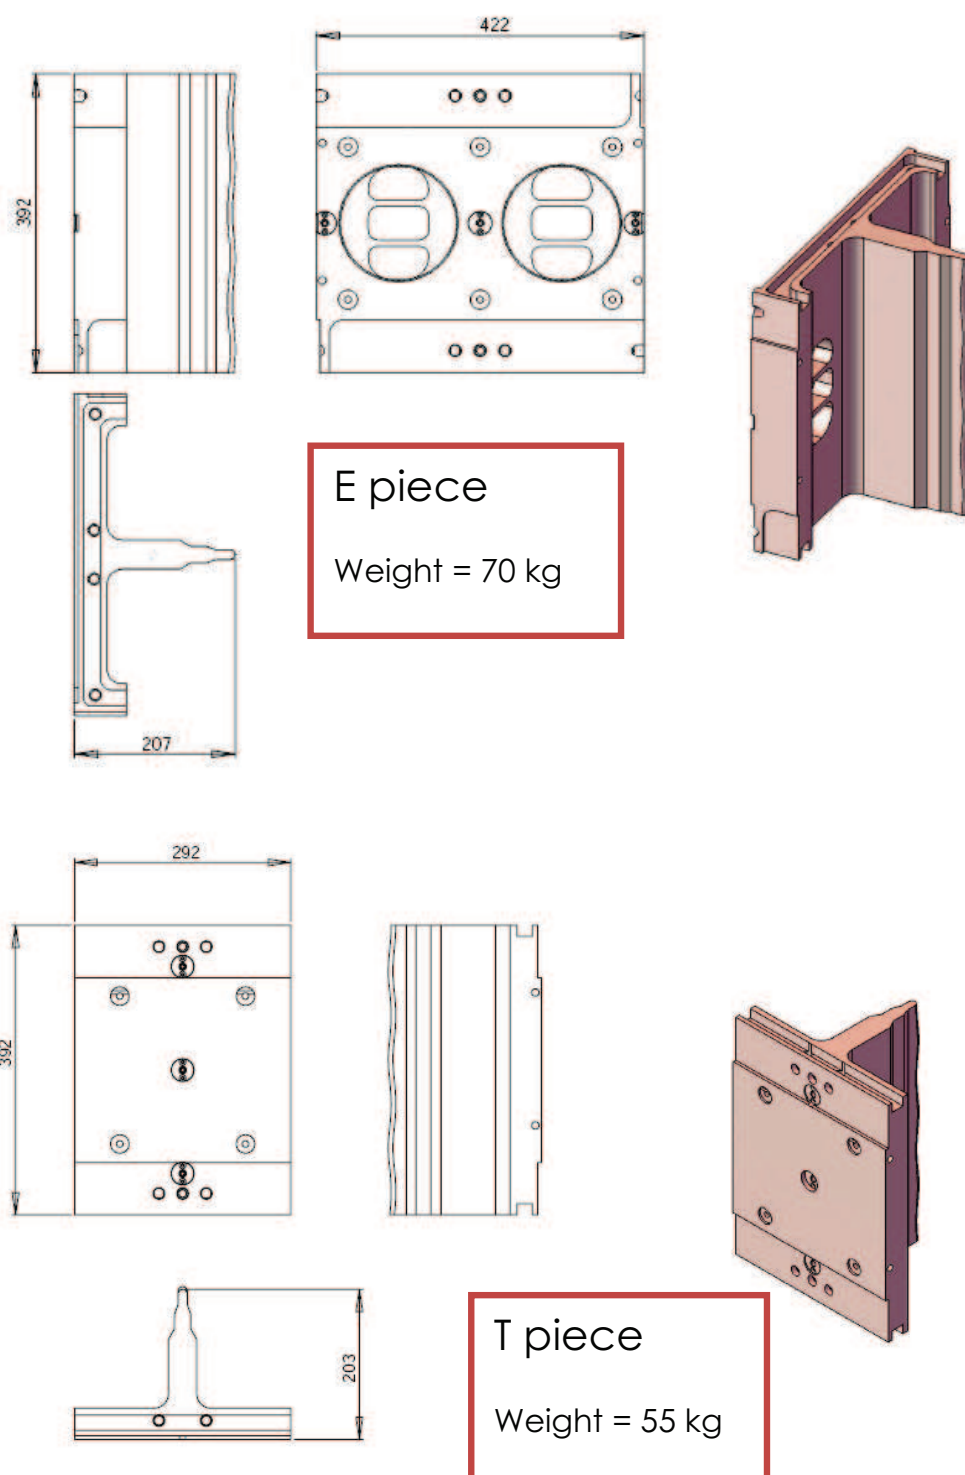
Sketch of the two types of copper pieces that compose the RFQ module.
